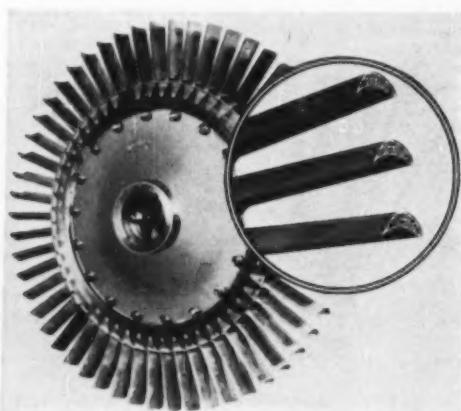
AIR-COOLED BLADES INSTALLED ON TEST TURBINE WHEEL
